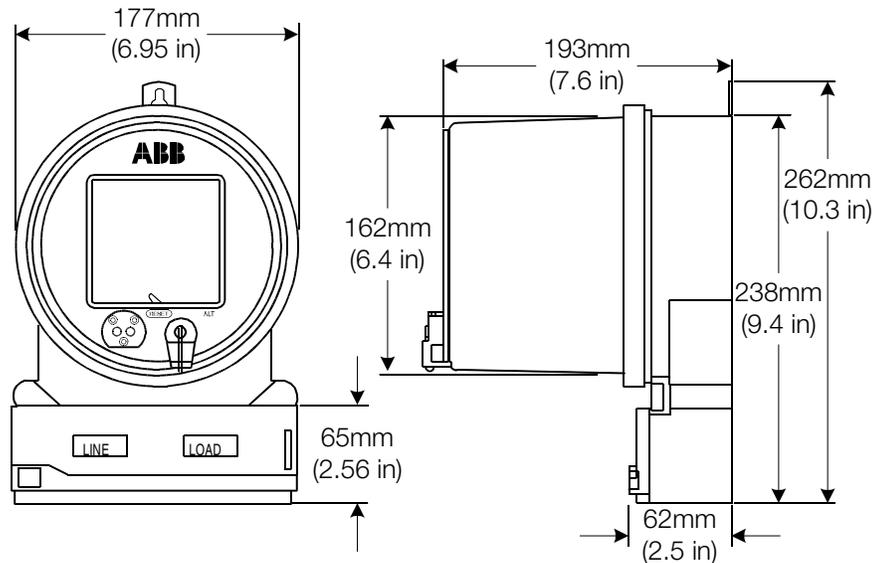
Bottom-connected (A-base) meter, front and side view
